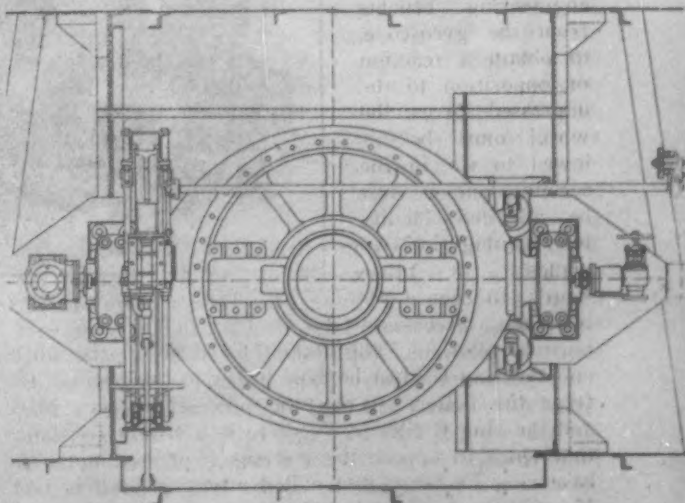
Plan View of the Stabilizing Gyroscope Placed on the See Bar.
